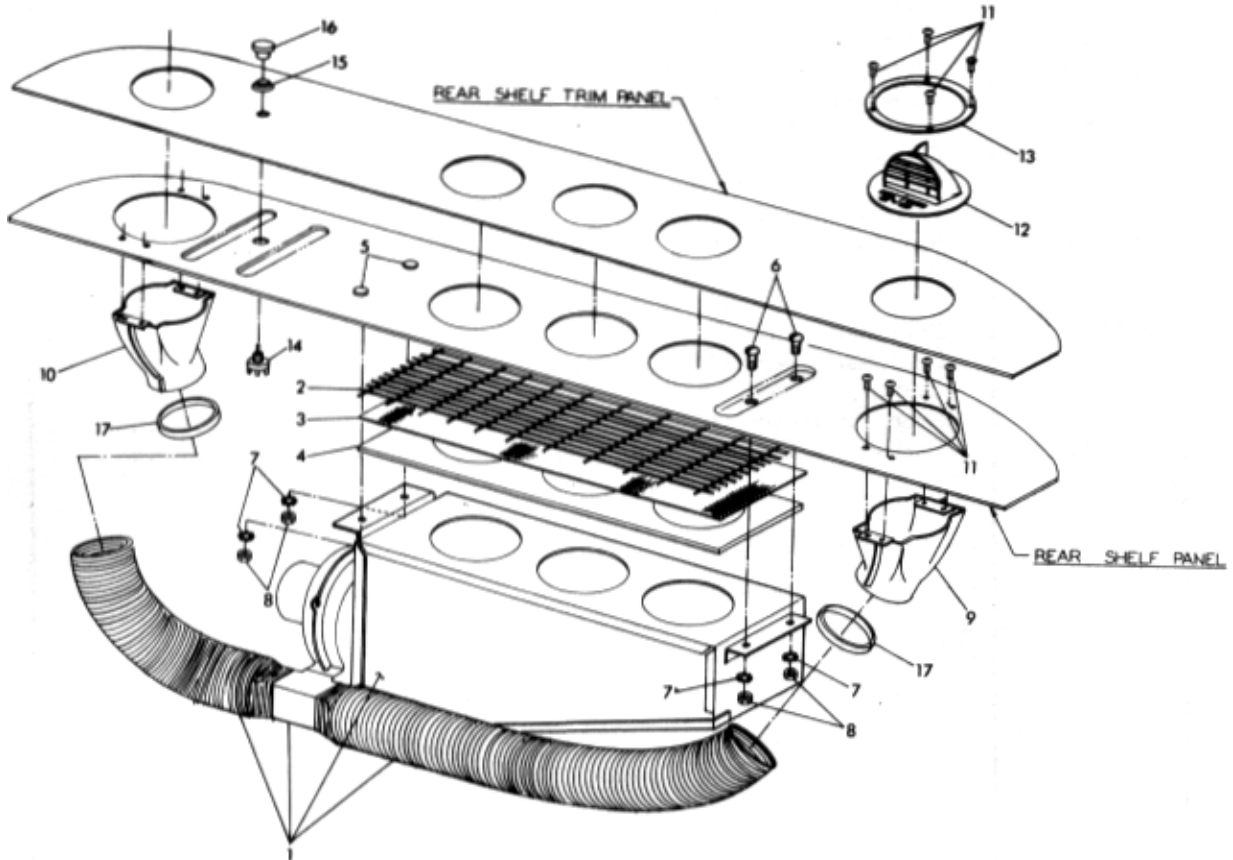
Air Conditioning Evaporator Assembly .Rear
